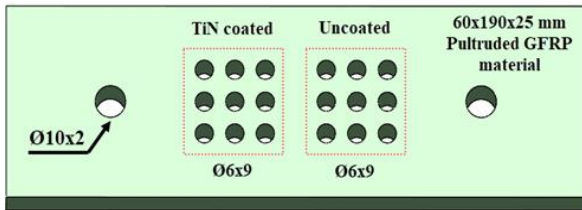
Illustration of pultruded composite workpiece and related hole diameters
